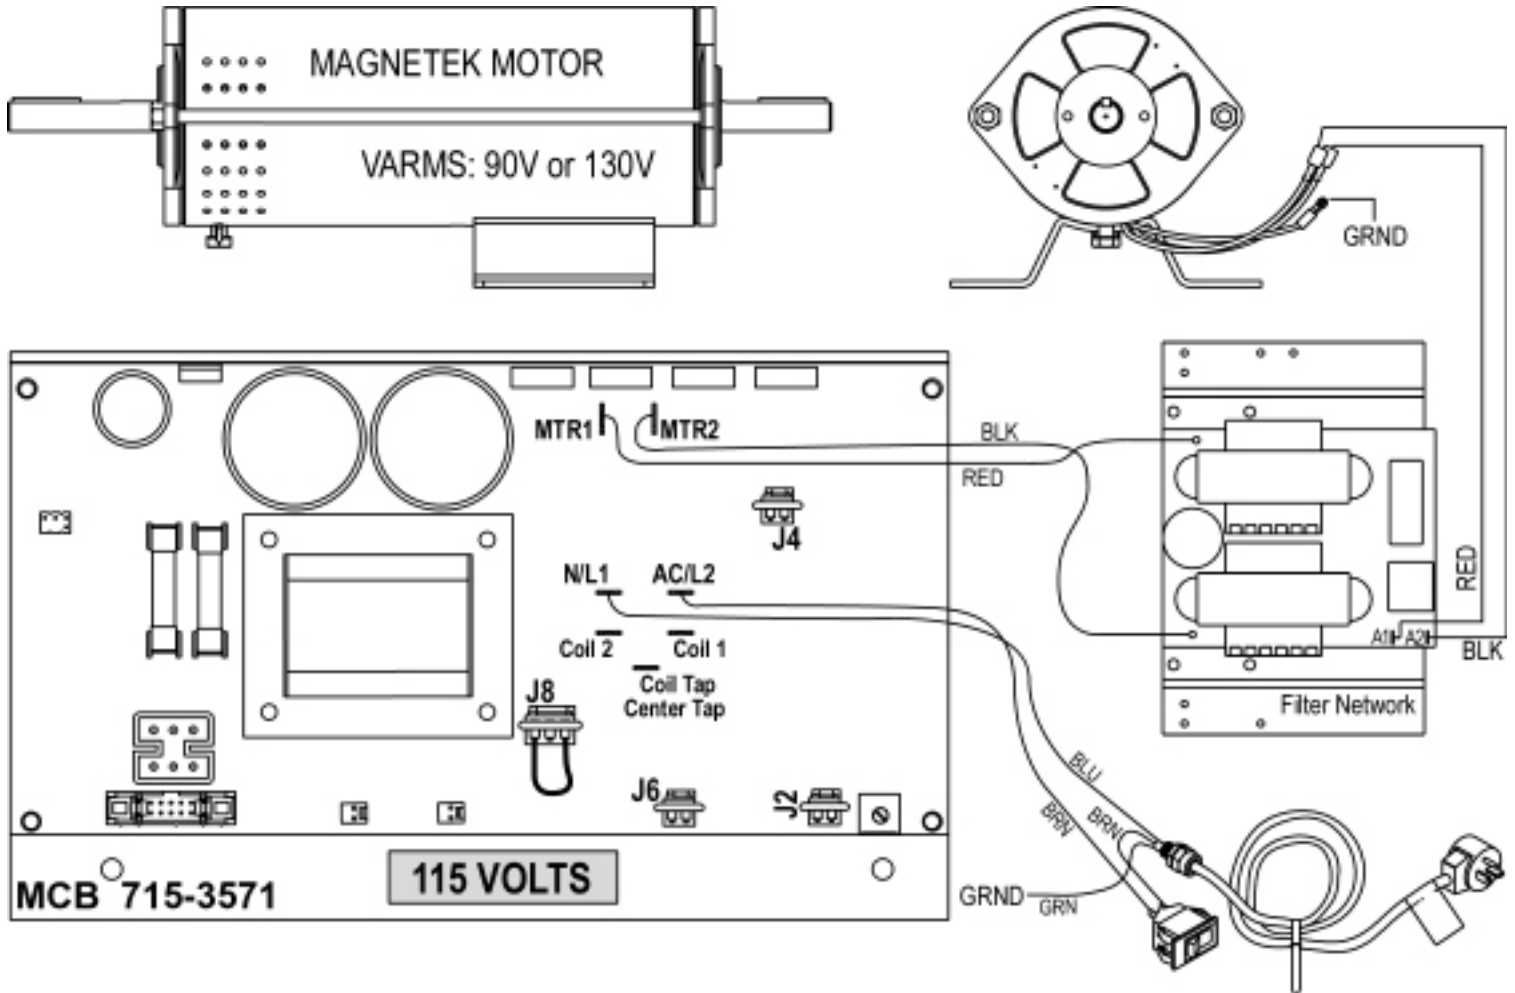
715-3571 MCB WIRING DIAGRAM WITH 110 VOLT MAGNETEK MOTOR 260-0904
